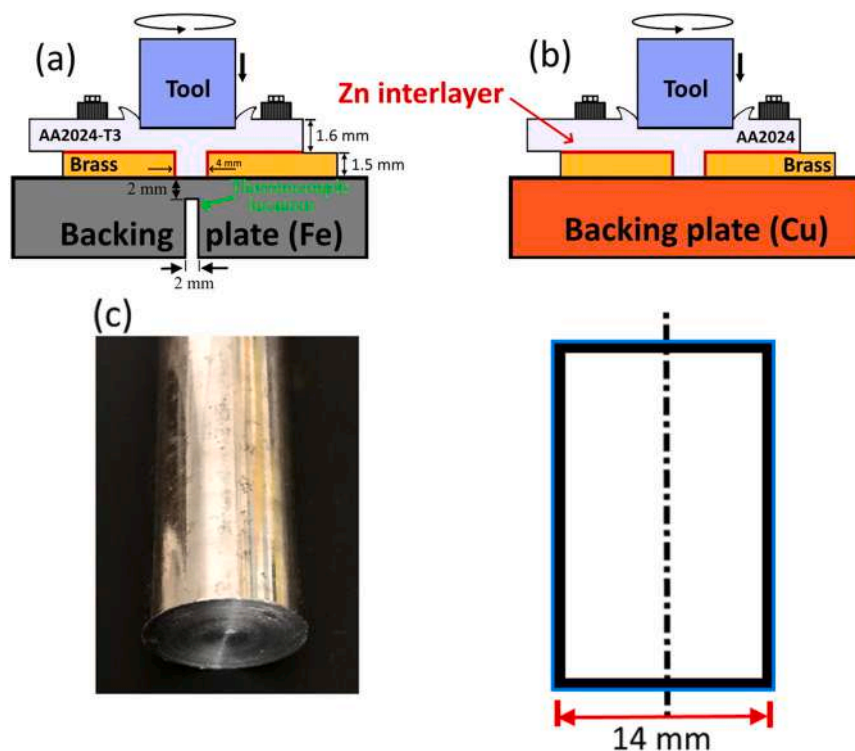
Schematic of FSEB technique with (a) copper and (b) steel anvils, (c) tool used in this investigation.
